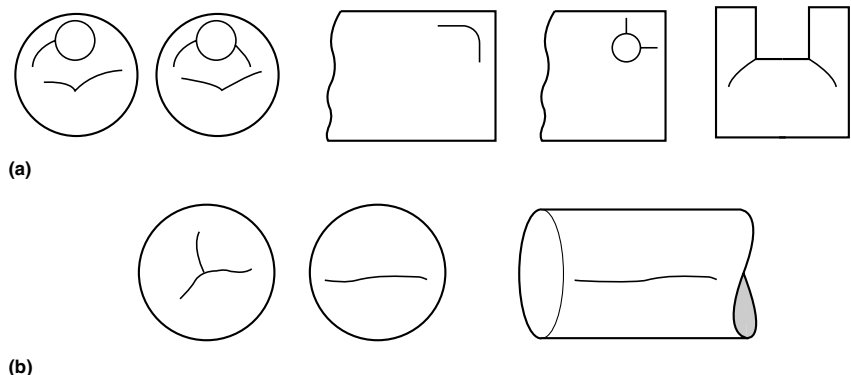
Two forms of quench cracking. (a) Pull cracking (b) Push cracking
